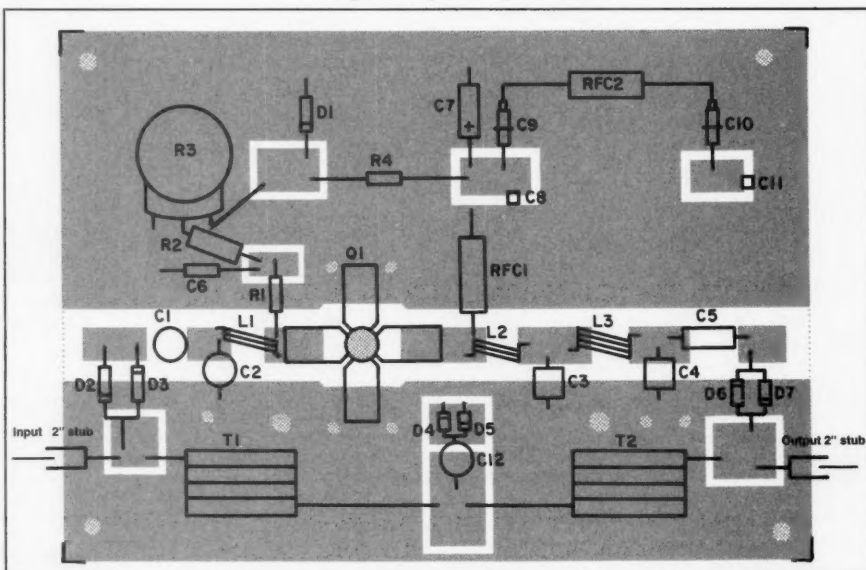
Parts placement. Mount components directly to the etched side of the PC board.
